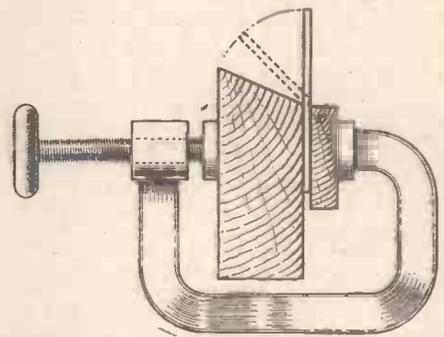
Using a clamp for holding the former and aluminium strip for shaping a chine.
